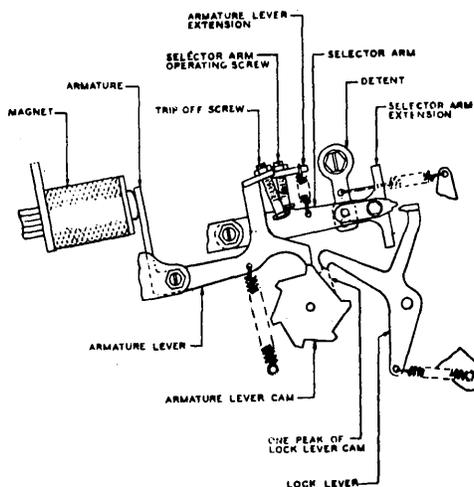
Selecting Mechanism Equipped with Holding Magnet
